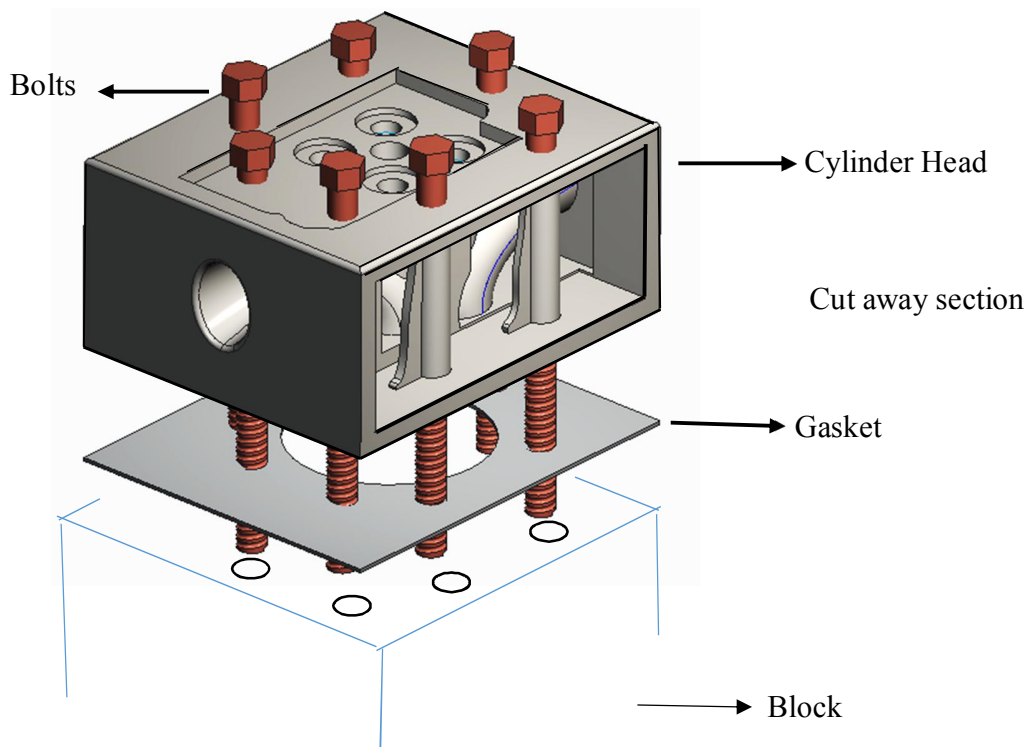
Shows exploded view for bolts layout on new cylinder head model, gasket and block. The radius of hole for each bolt is 6.5 mm
